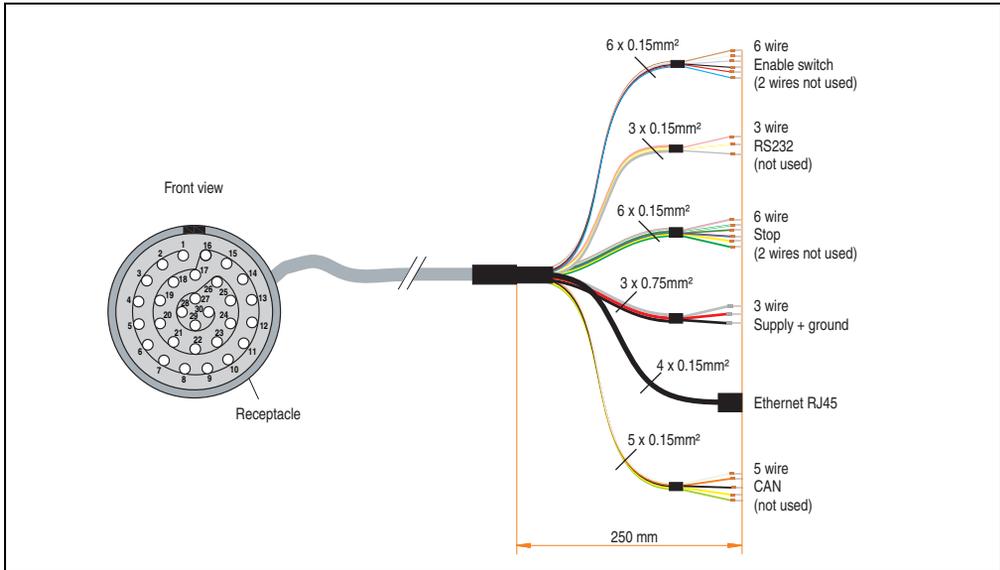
Cable layout - switching cabinet cable 5CAMPC.0020-11
